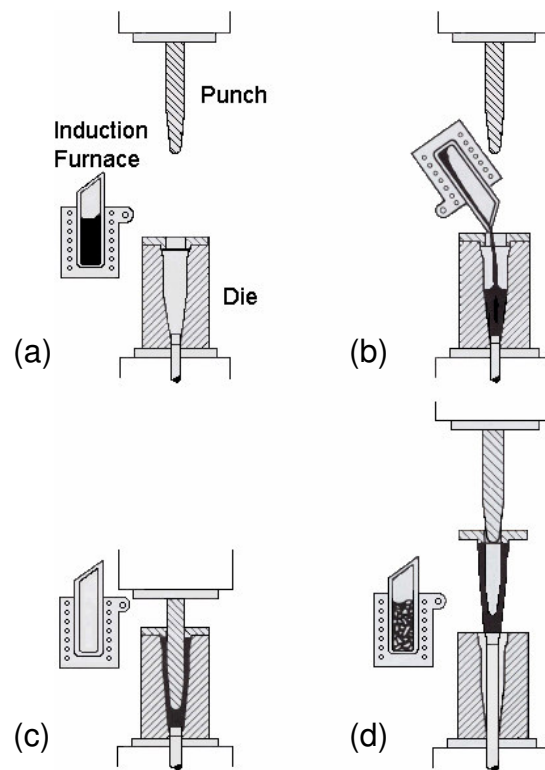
Schematic illustrating squeeze casting process operations.
